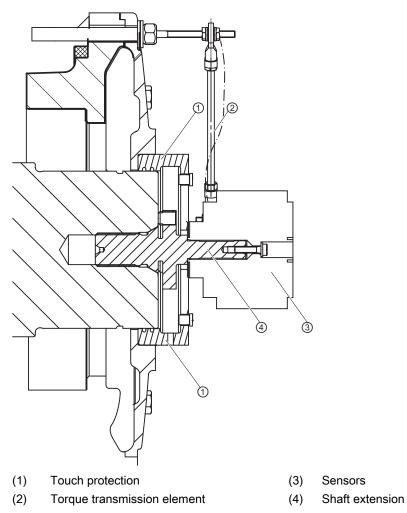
Detailed view of the speed sensor for the water-cooled 1FW4 motor
